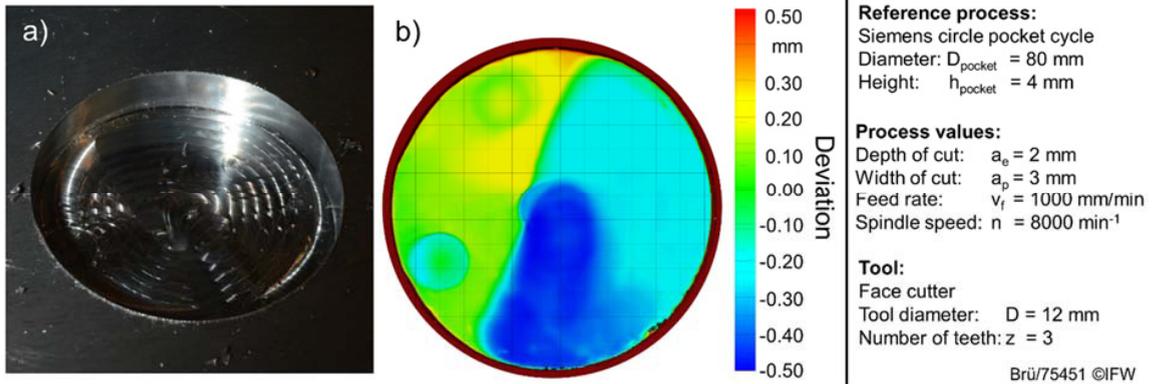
Characteristic shape errors due to gear backlashes: a) machined surface, b) measured surface.
